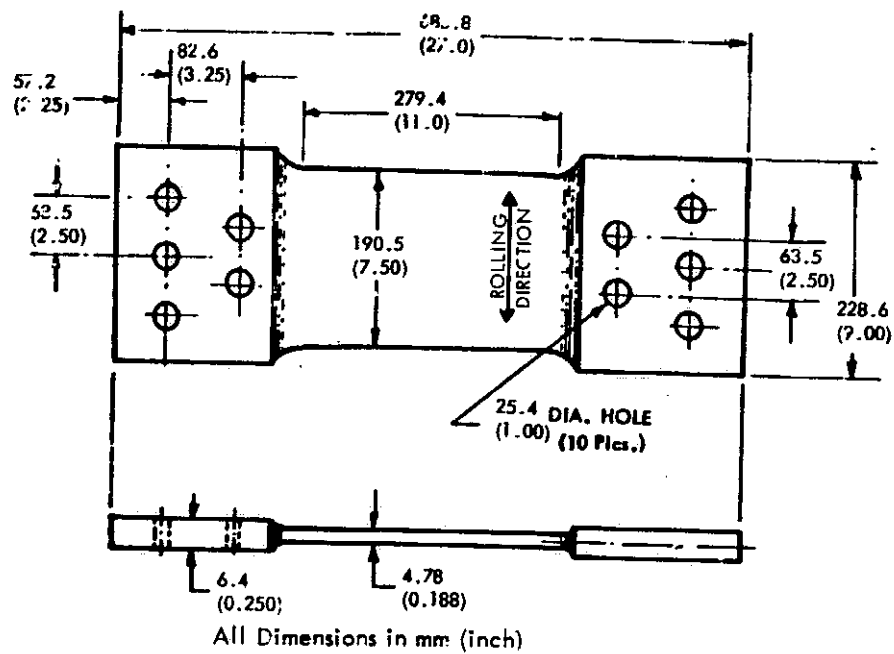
ALUMINUM SURFACE FLAWED SPECIMEN
